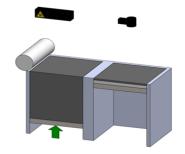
Typical components of a Direct Metal Laser Sintering (DMLS) machine.
